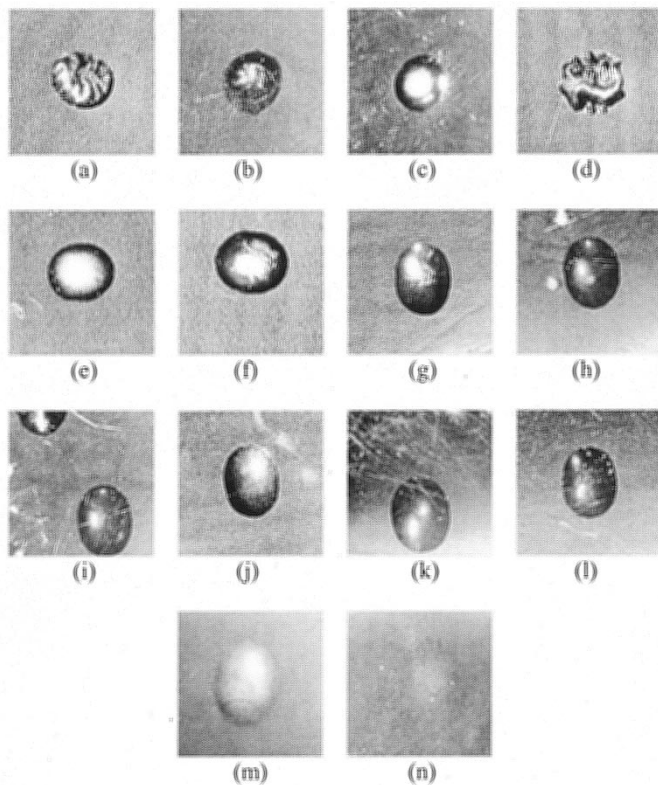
Photographs of solder wetting on copper clad: (a) to (f) 95.9Sn/3.4Ag/0.7Cu solders on Formulas 1 to 6, respectively; (g) to (l) eutectic Sn-Pb solders on Formulas 1 to 6, respectively; (m) and (n) eutectic Sn-Pb solders on Formulas 5 and 6 with 20wt%  $\text{SiO}_2$  filler of size  $5 \mu\text{m}$ .
